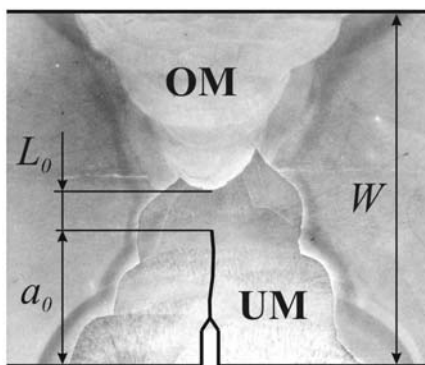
Cross-section of the welded joint with notch position in UM weld metal.
